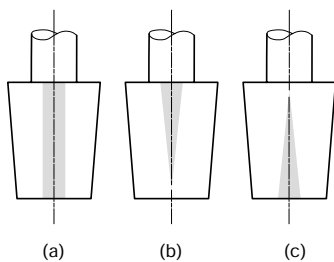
Checking the angle of taper: (a) 'smear' indicates that the hole has the same taper as the plug gauge; (b) 'smear' indicates that the hole has a smaller angle of taper than the gauge; (c) 'smear' indicates that the hole has a larger angle of taper than the gauge
